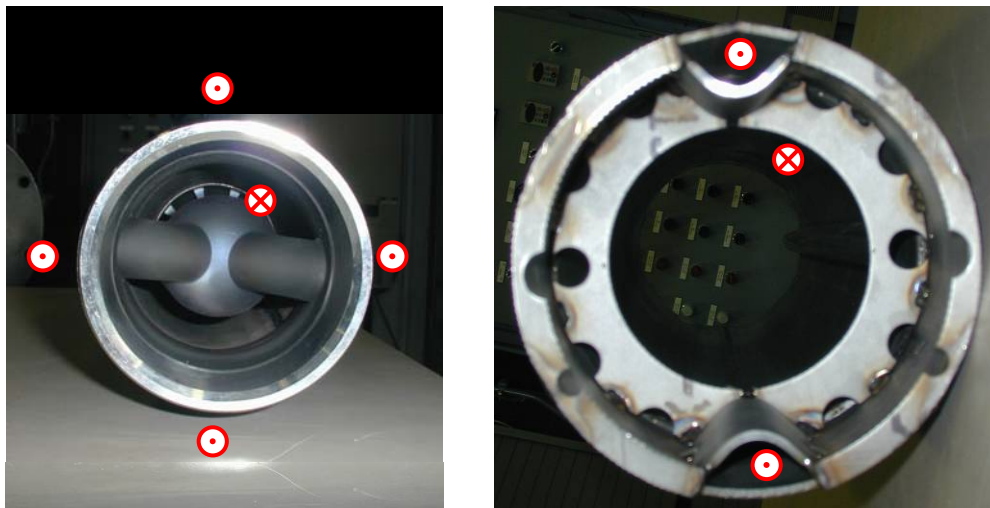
RASERT Variant I: Crossover casting in the heat exchanger weldment (left) and scalped stabilizer plate and stabilizer ring (right)
